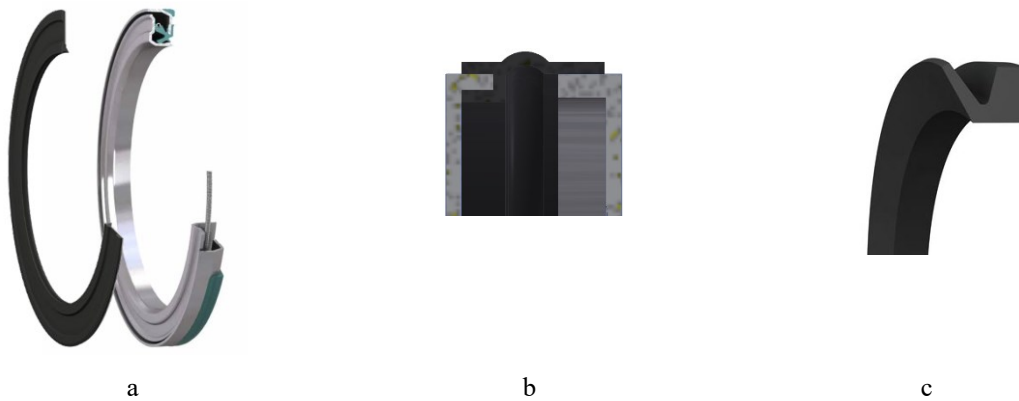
Sealings of the developed motor: a - Seal of the wheel hub bearing [160], b - Static seal of the supplementary bearing, c - Dynamic seal of the supplementary bearing
